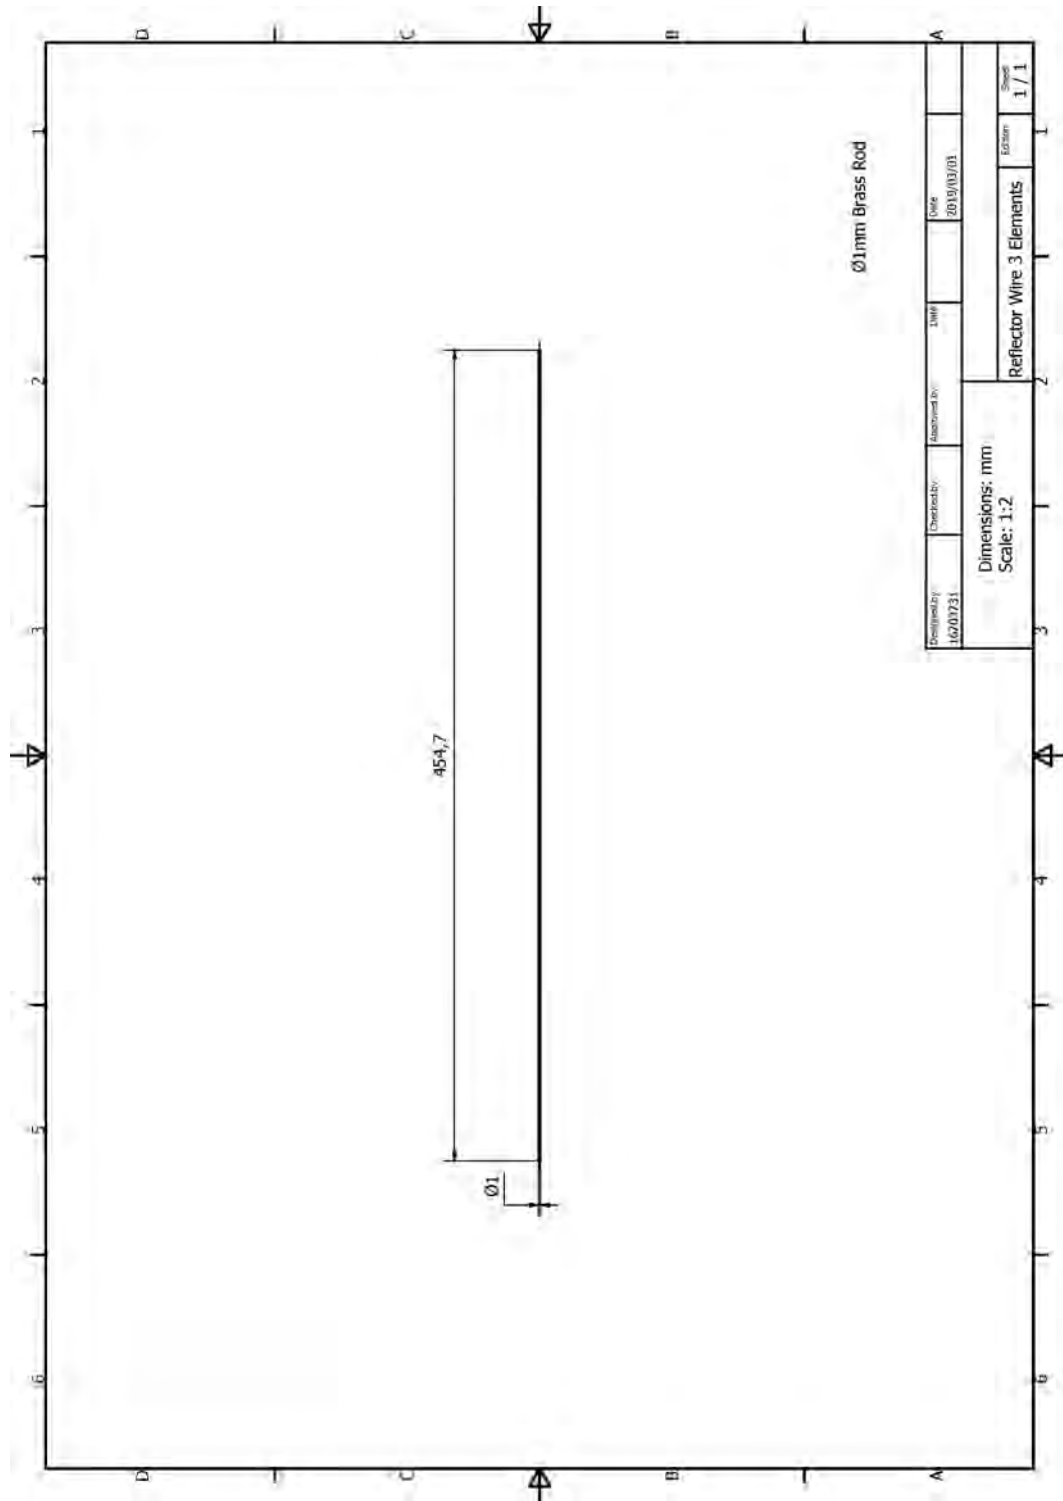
1:100 scale three element model brass reflector wire engineering drawing. This engineering drawing shows the Ø1 mm brass rods used for the half reflector in the 1:100 scale three element model.
